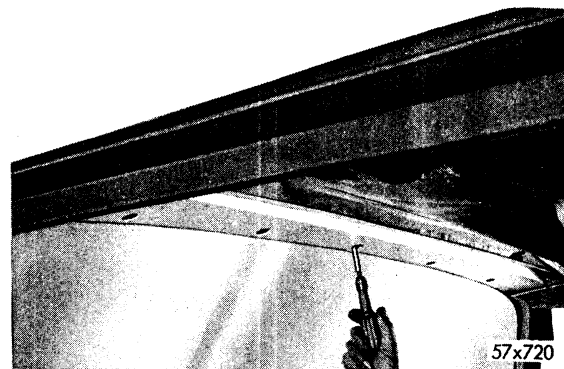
Removing or Installing Moulding Retaining Screws (Imperial Models)
